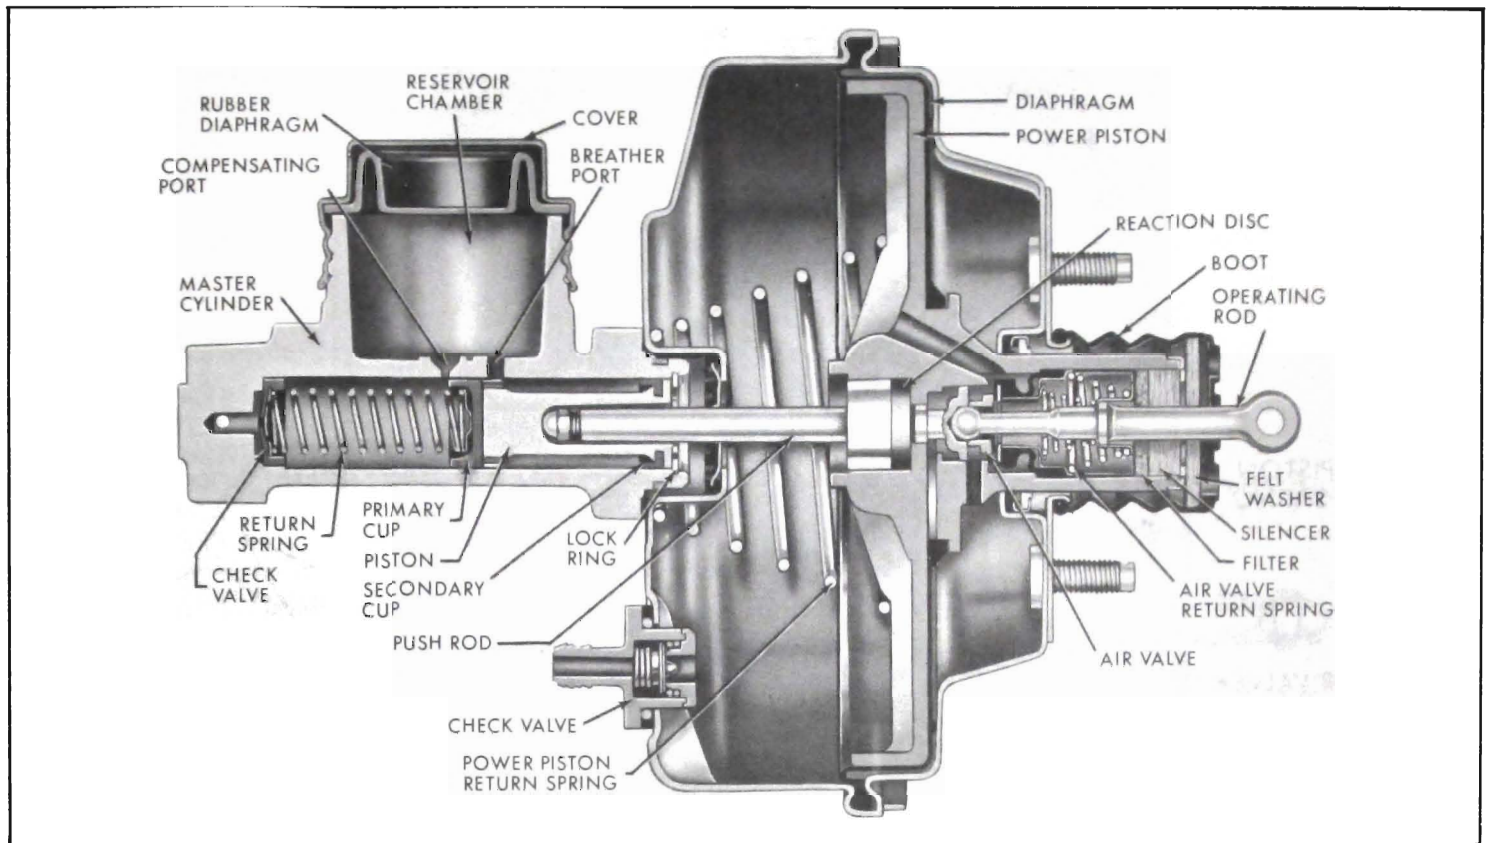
Power Brake and Master Cylinder Assembly - Cross Section
